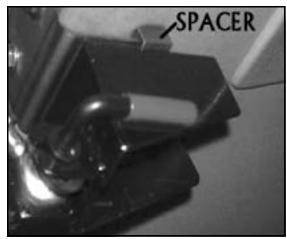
LEFT-DOOR ANGLE/CLEVIS BRACKET ASSEMBLY INSTALLATION
